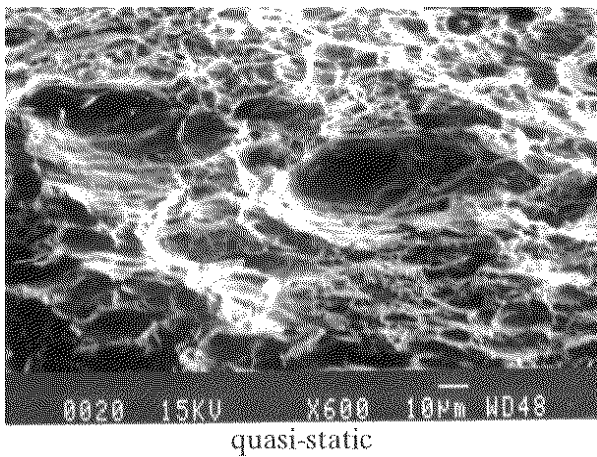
Fracture surfaces of specimens tempered at 200 °C.
